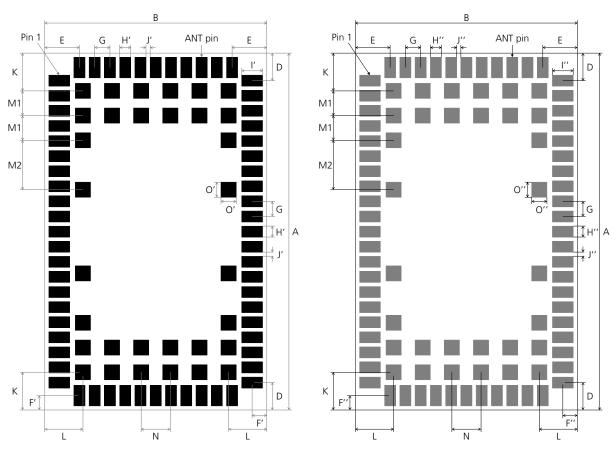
SARA-G3 series modules suggested footprint and paste mask (application board top view)
